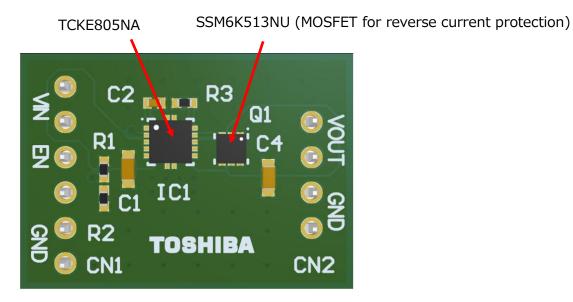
Pattern layout of TCKE805 Series application circuit board
